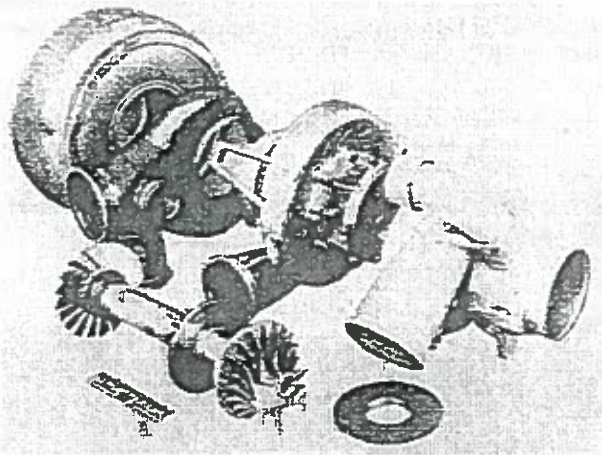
DC-10 Foil Bearing Air Cycle Machine
